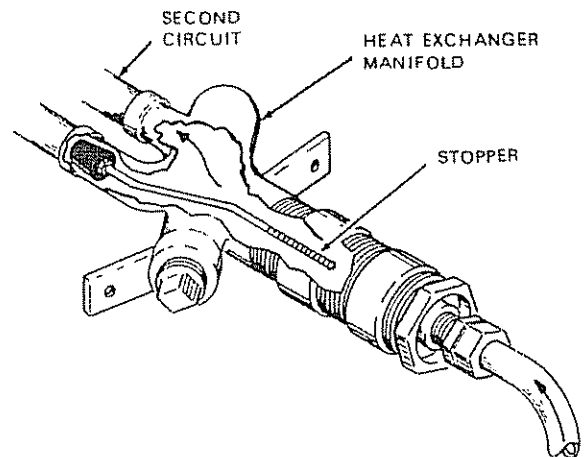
UNITS WITH 160,000 THRU 225,000 BTUH INPUT
